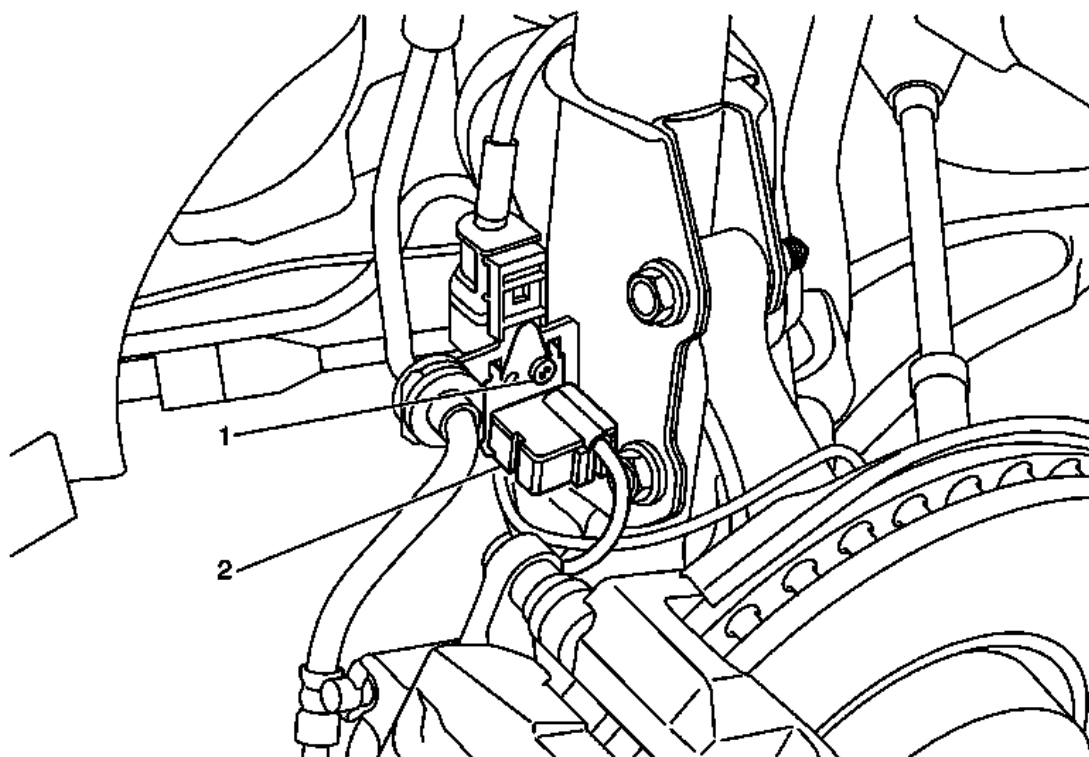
View Of Electronic Suspension Front Vertical Accelerometer - Lower
